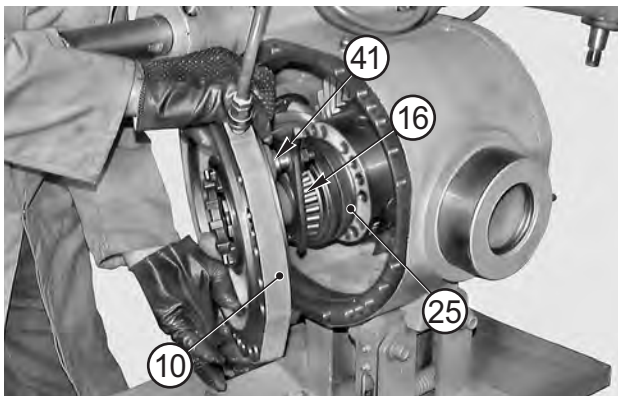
Introduce low-pressure compressed air through connection and make sure that the lock control piston comes out at the end of stroke. Rotate the intermediate cover (10) to an angle of about 45°; engage the fork (16) in the lock control coupling (25).
